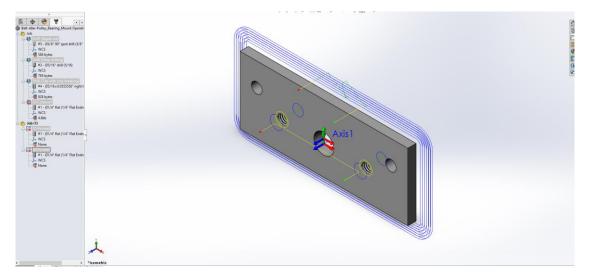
CAM Operation for Sleeve-Bearing Mount.
